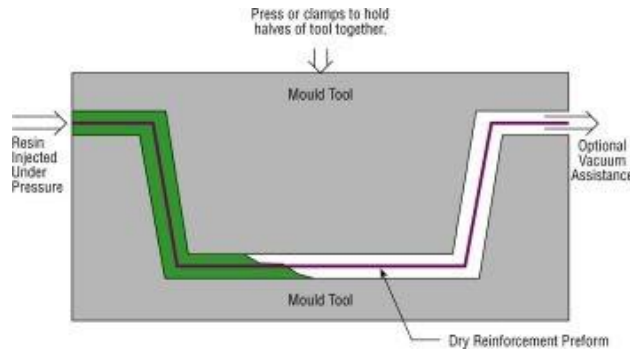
Vacuum Assisted Resin Transfer Molding [1]
